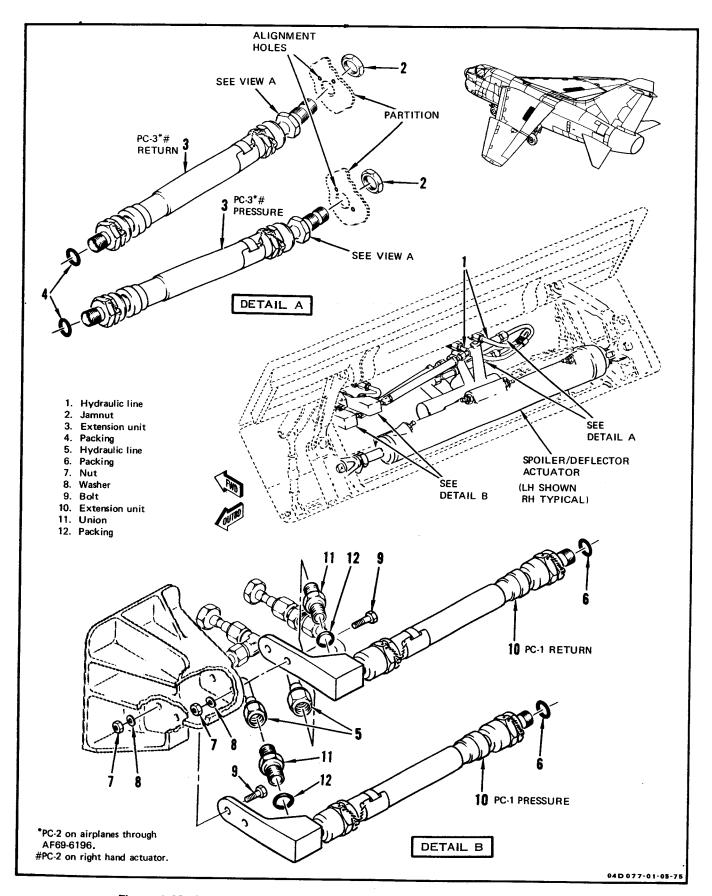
Spoiler/Deflector Extension Unit Removal and Installation (Sheet 1)
